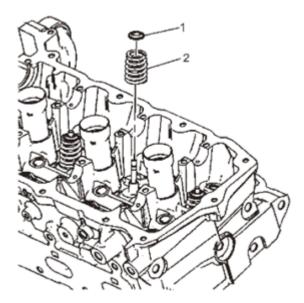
Identifying Valve Spring Retainer And Valve Spring Courtesy of SUZUKI OF AMERICA CORP.
